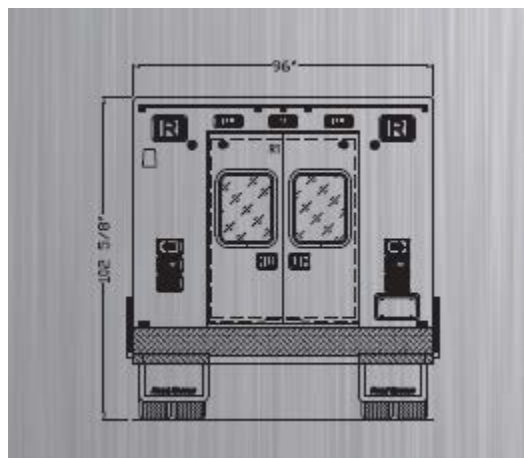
Promedic Type III Chevrolet G3500 Rear Dimensions
